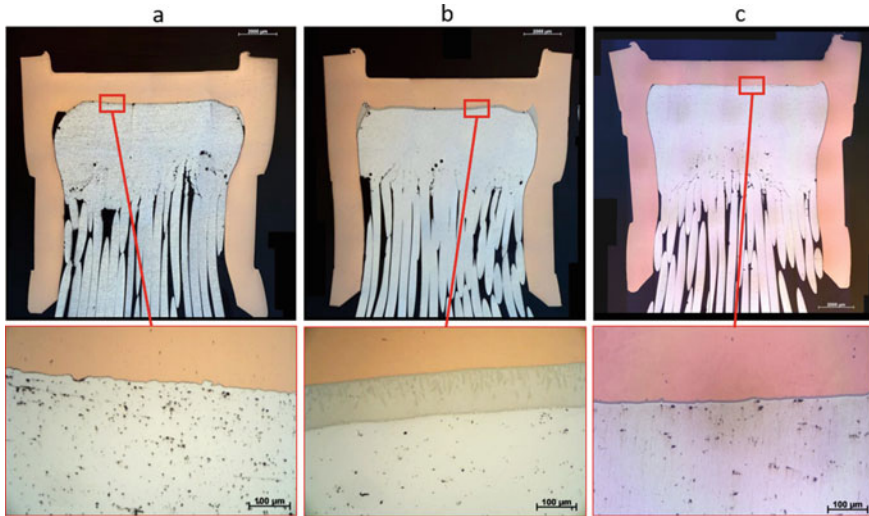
Cu-terminal welded to Al-cable with FSSW. a Thin layer between CU-cap and aluminum cable. b Eutectic layer with a 100 μm thickness. c Cap coated with nickel
